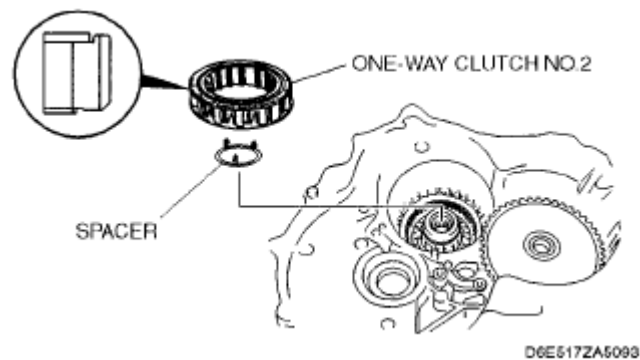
View Of Spacer, One-Way Clutch No.2 And Transaxle Case
